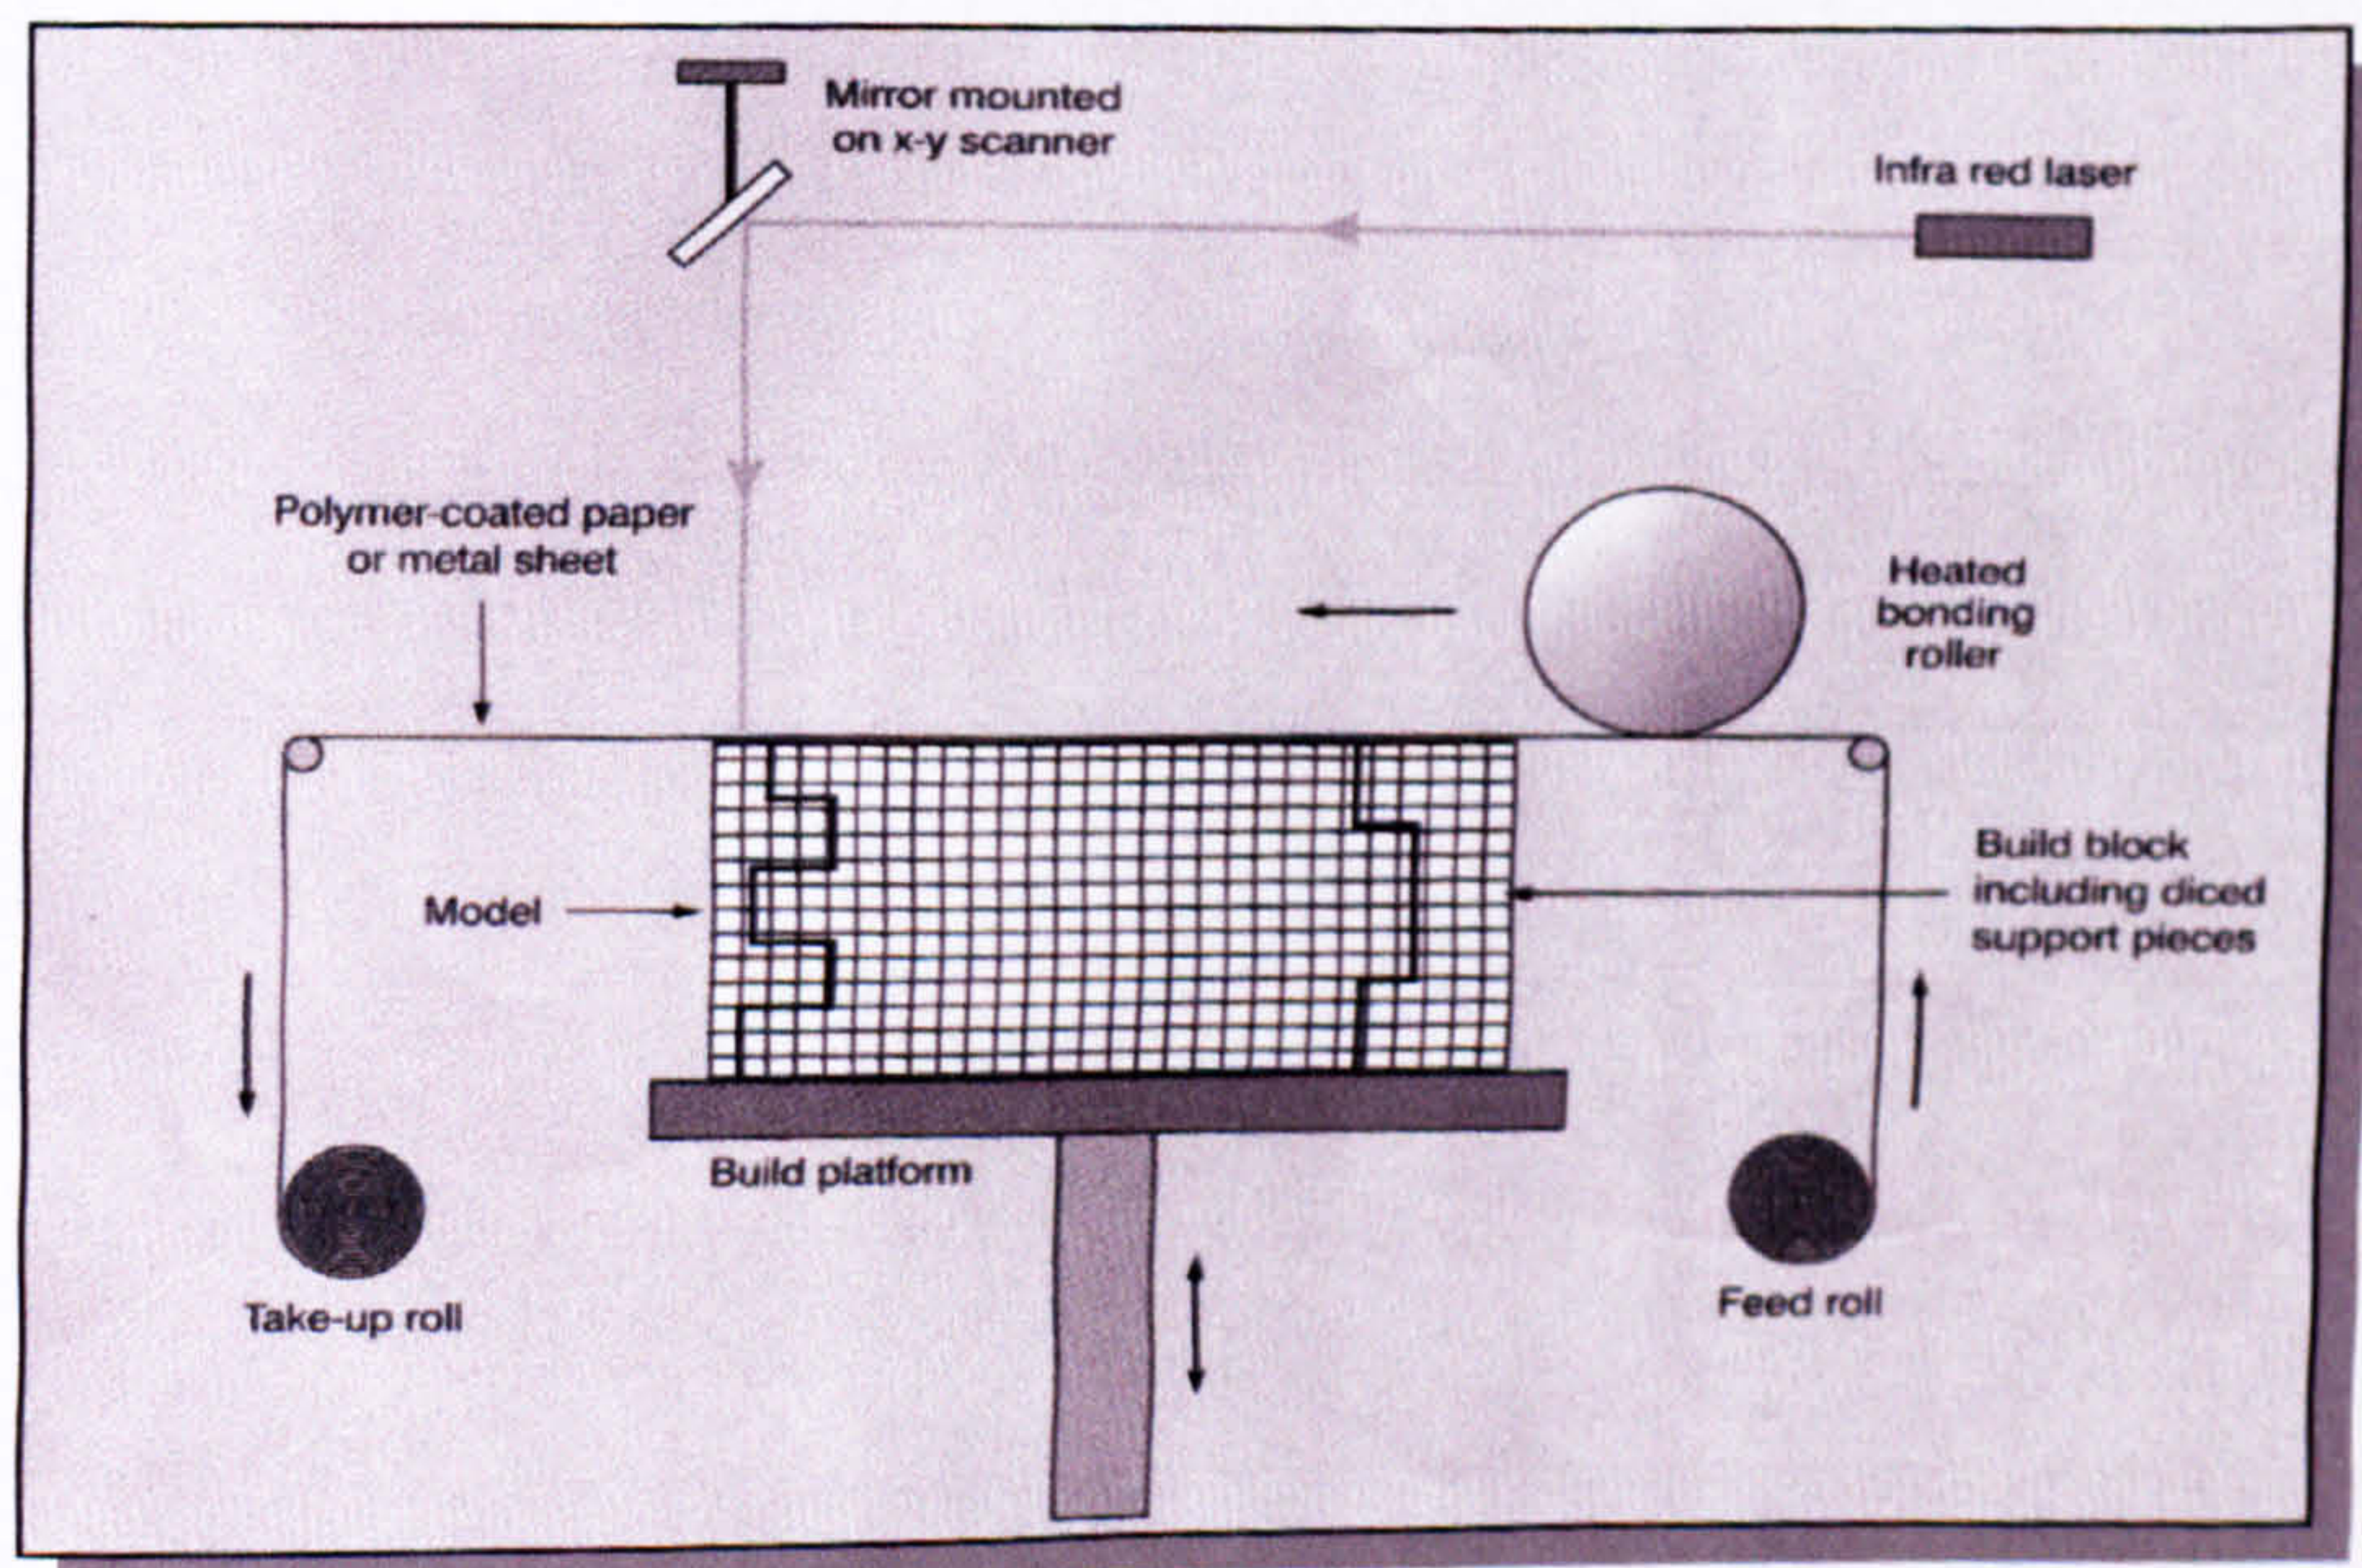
Schematic of conventional layer object manufacture (LOM) machine
